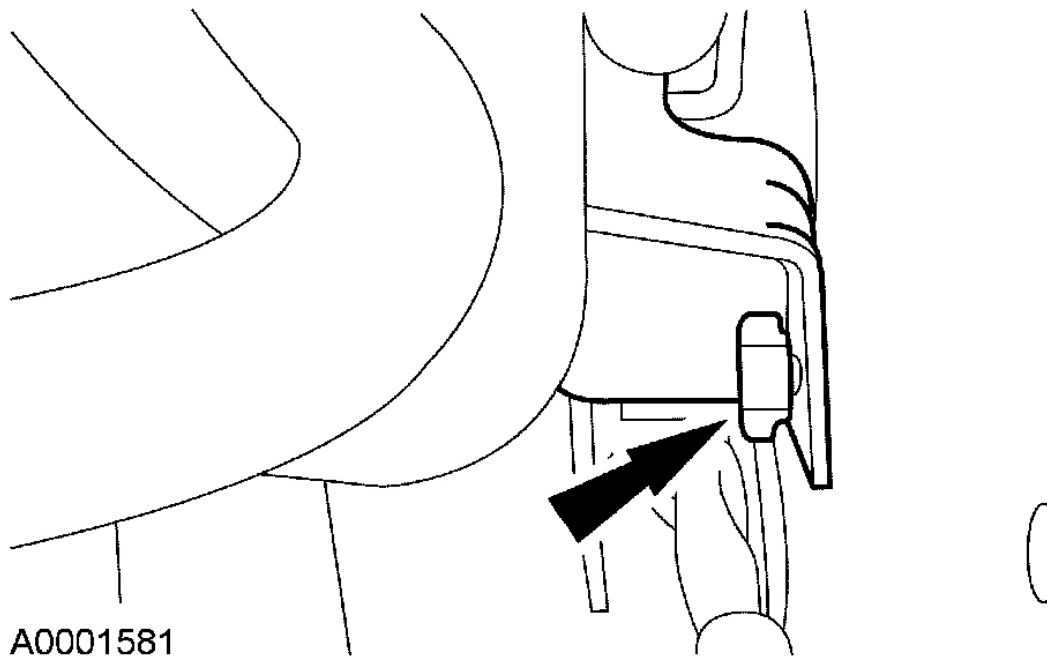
Identifying Engine Components (4 Of 4)
